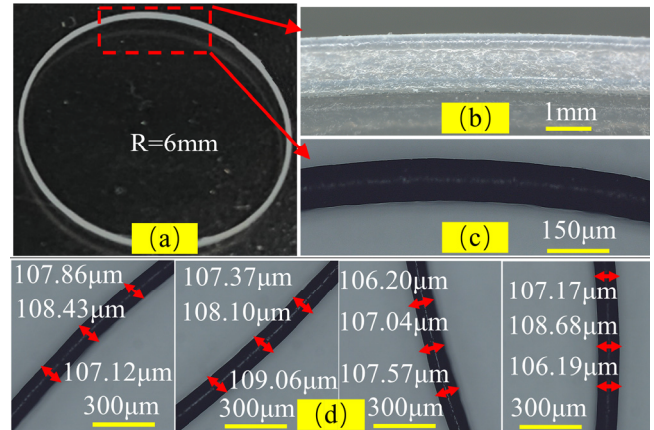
Structural morphology of large aspect ratio ring: (a) overall macro image, (b) Enlarged view of the front side, (c) Enlarged view of the top, and (d) Ring diameter measurement diagram.
